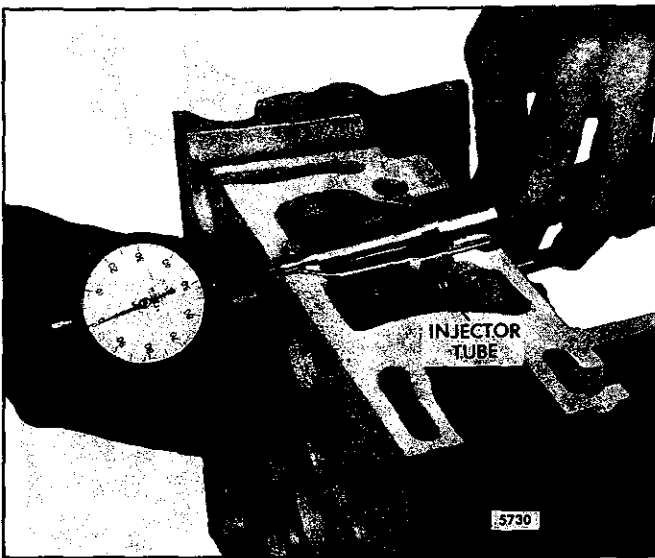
Measuring Relationship of Bevel Seat in Injector Tube to Cylinder Head Fire Deck Using Tools J 22273 and J 2
